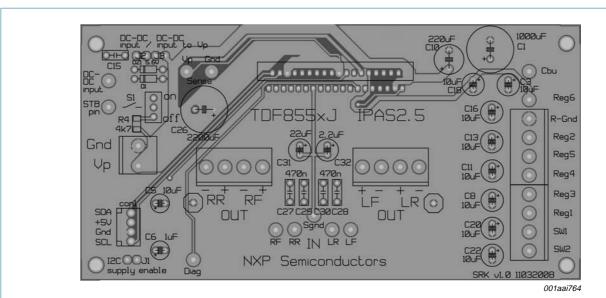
Printed-circuit board layout of test and application circuit showing components and top copper layout viewed from top
